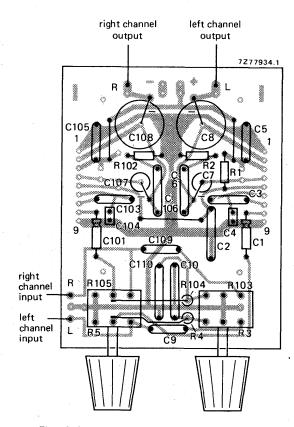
Component side of printed-circuit board showing component layout used for the circuit of Fig. 12. Balance control is not on the p.c. board.
